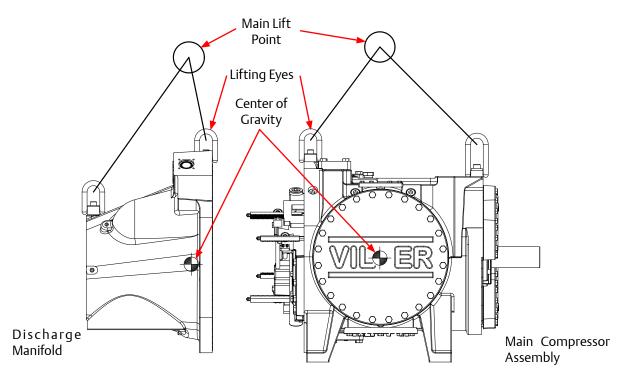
Bare Shaft Compressor Center of Gravity - Discharge Manifold and Main Compressor Assembly (Models 2401-3001)
